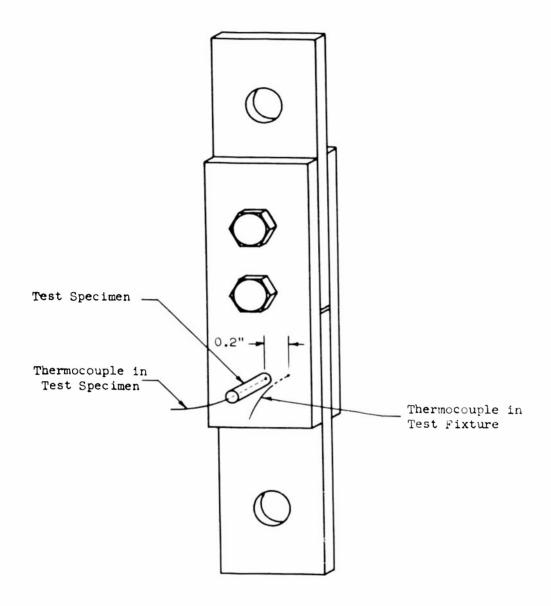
LOCATION OF THERMOCOUPLES IN SHEAR SPECIMEN AND TEST FIXTURE
